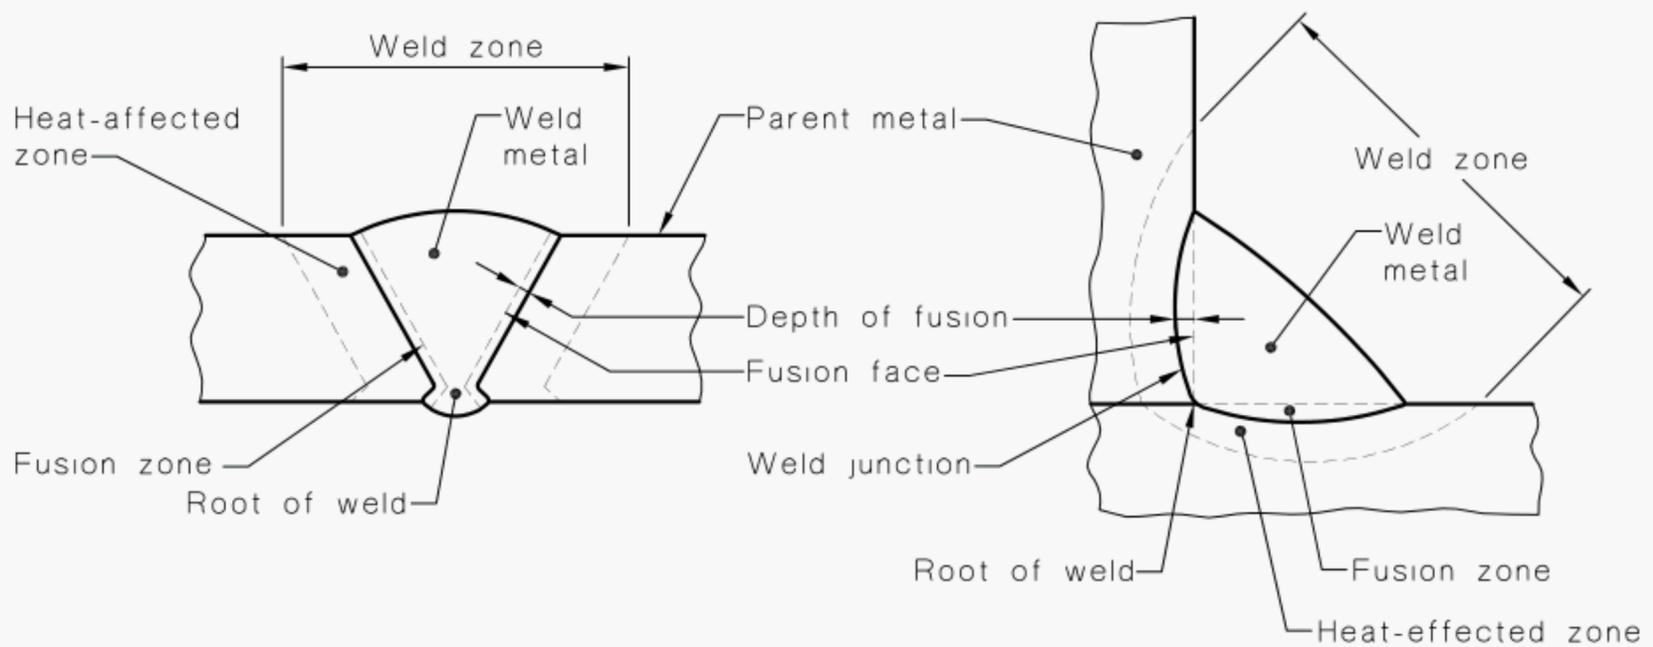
ROOT, DEPTH OF FUSION, WELD JUNCTION AND ZONES OF TYPICAL WELDS
